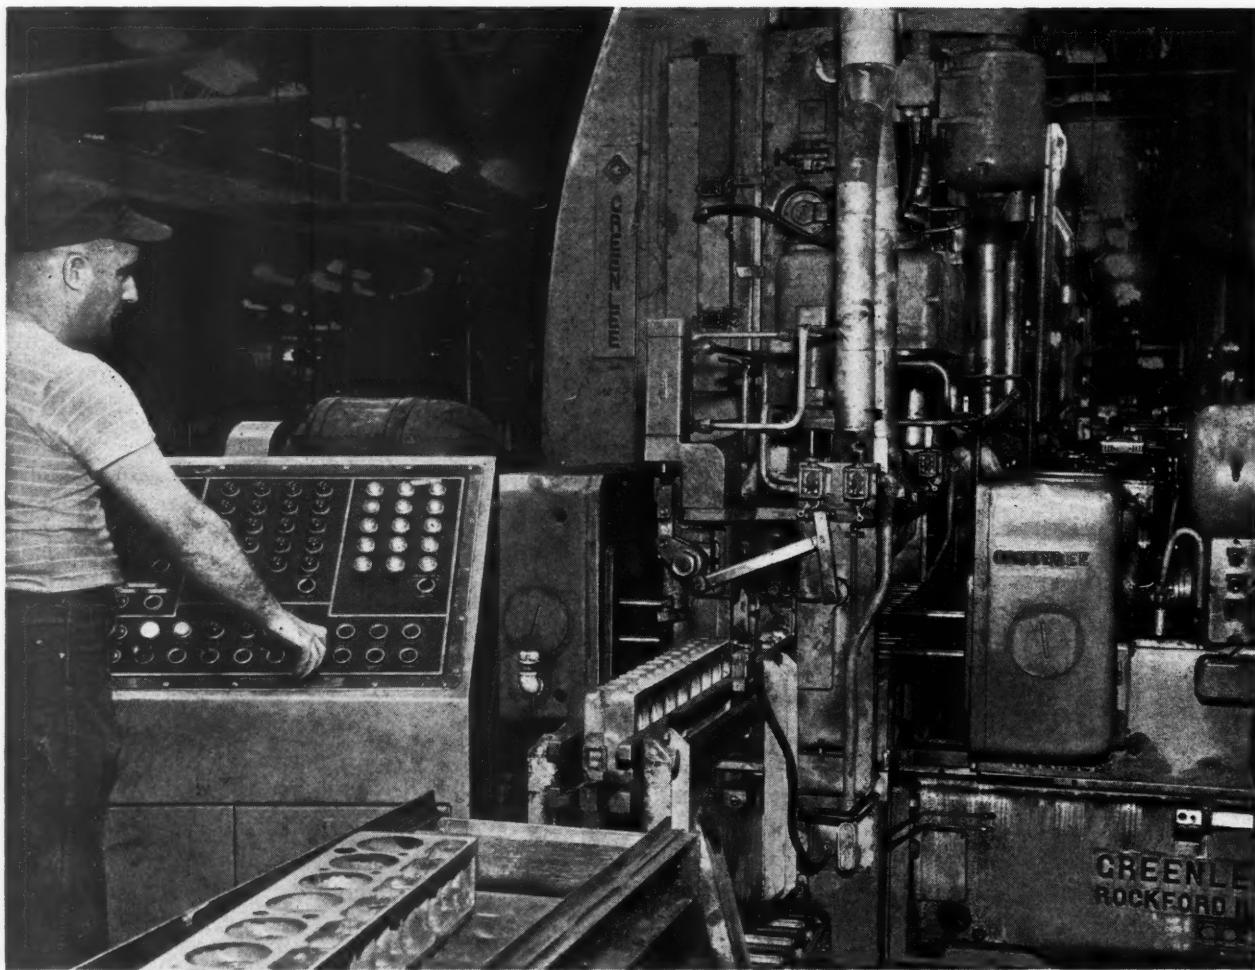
Loading end of a fifteen-station automatic transfer type machine employed to drill, ream, chamfer, or mill various holes in the cylinder heads at the rate of seventy-four per hour
